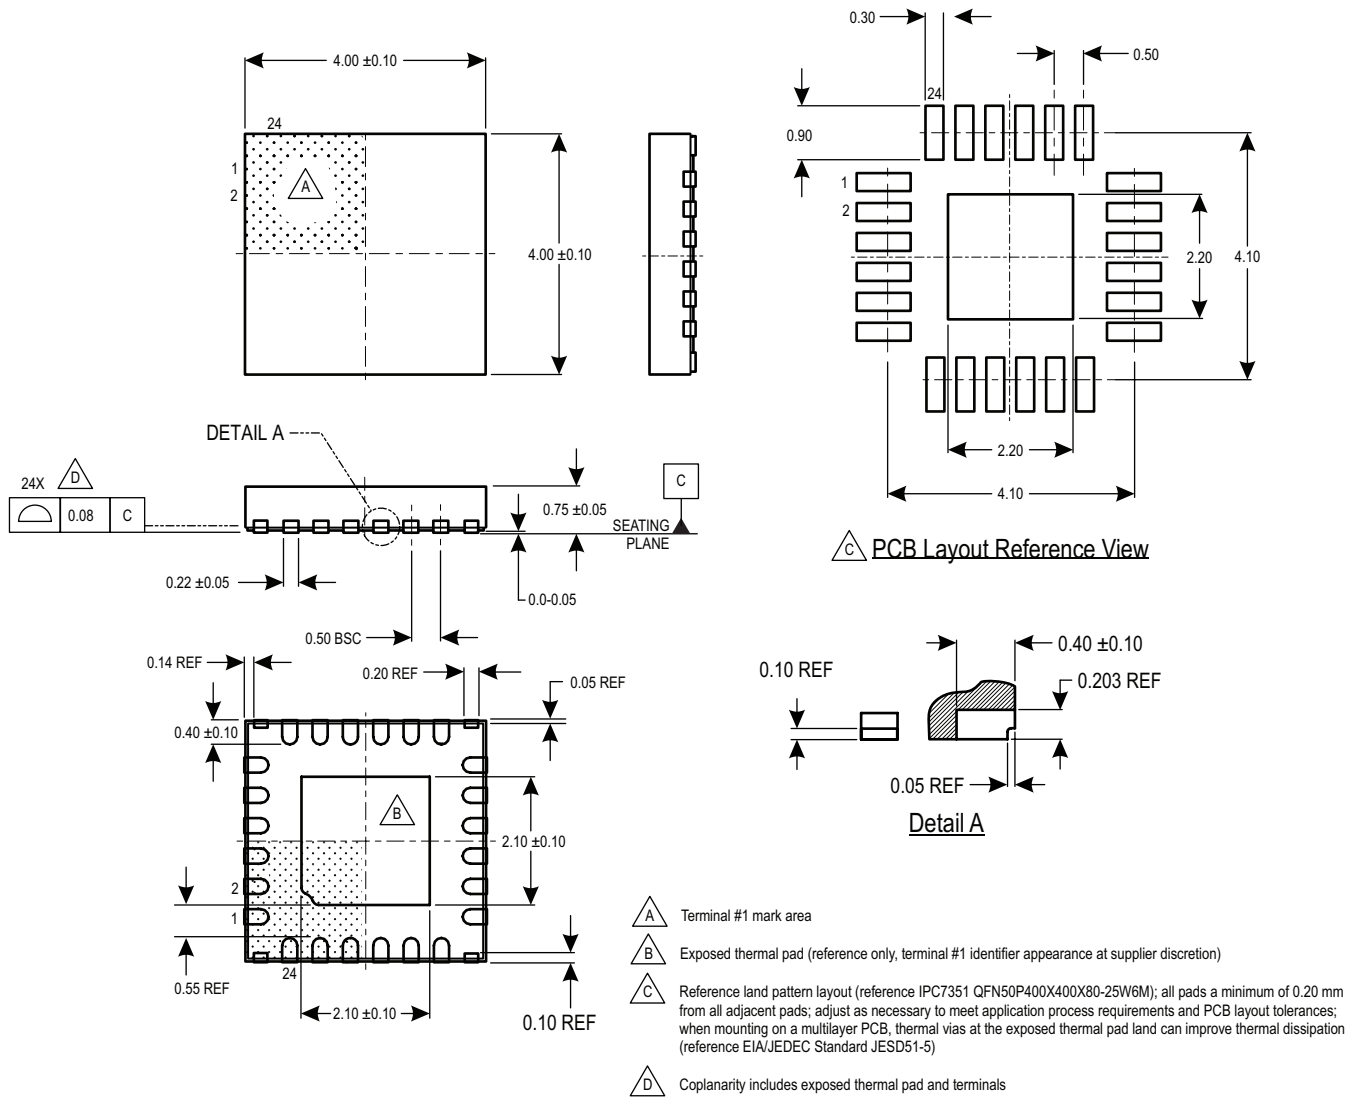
Package ES, 24-pin wettable flank QFN with exposed thermal pad
